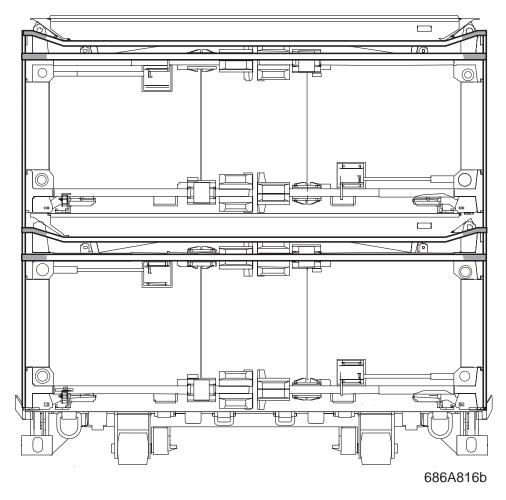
67 Flatrack Load V3 Lashing Arrangements
